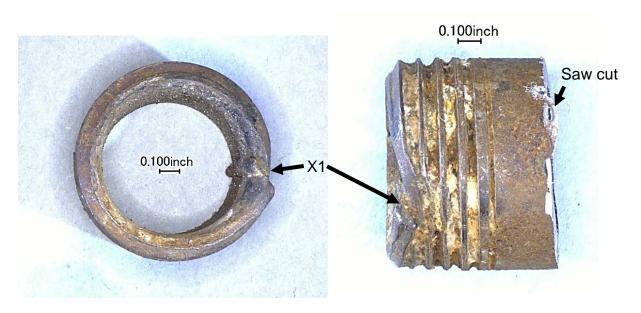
Side profile of pipe segment (right side of page) that fractured at the threaded end indicated by arrows "X1" in figure 1 and the fracture face (left side of page), prior to cleaning. The portion indicated by arrows "X1" contained evidence of bending deformation.
